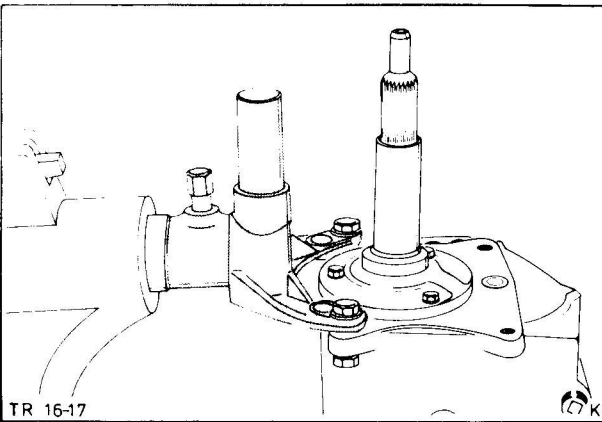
Secure gearbox to stand with Special Tool No. 16-009
